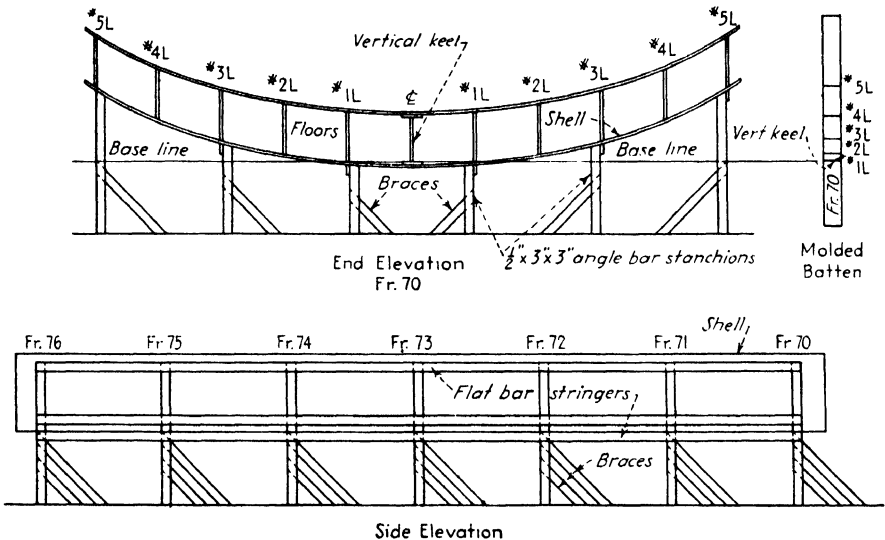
Jig for the subassembly of bottom-shell and innerbottom section.
